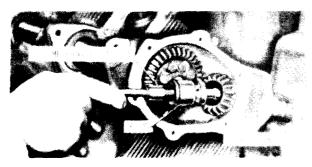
, Removing or installing camshaft drive gearshaft oil transfer plug.
